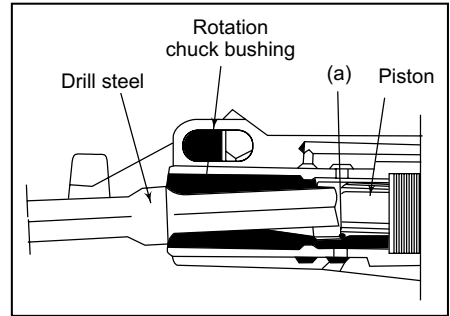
Result of worn bushing of rotation chuck in a hand held rock drill. The piston strikes the drill steel obliquely, damaging both of them
